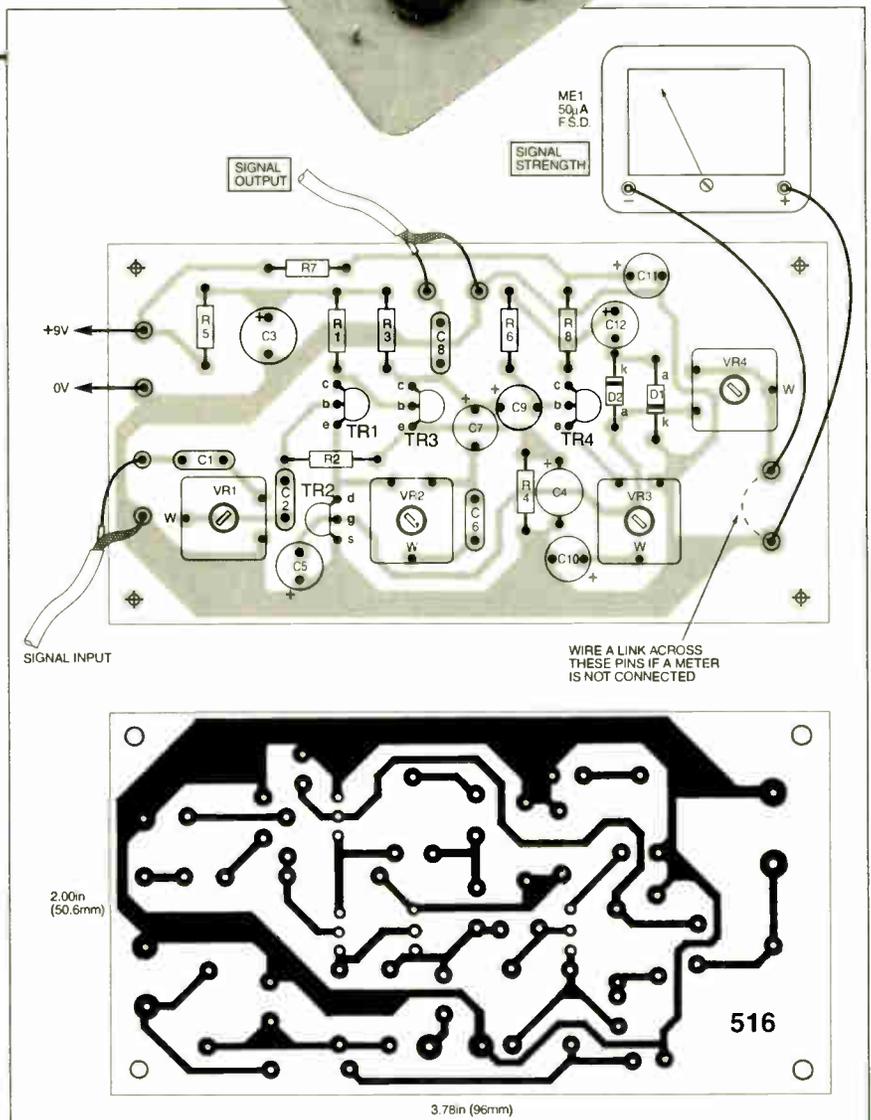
Printed circuit board component layout, wiring details and full-size copper foil master pattern for the Preamplifier. A photograph of the completed circuit board is shown above
